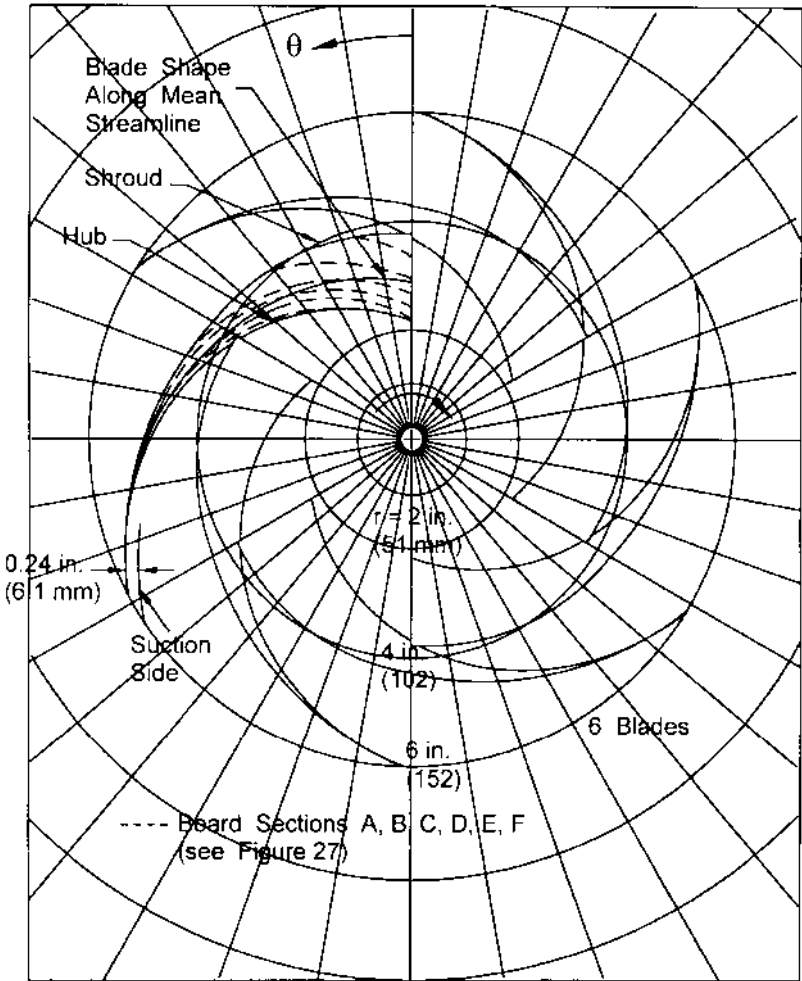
Impeller blading—polar view, showing pressure sides of the blades (design example)
